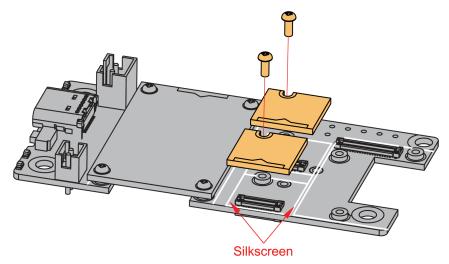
WisBlock Sensor silkscreen on the top of RAK19007 Base Board
